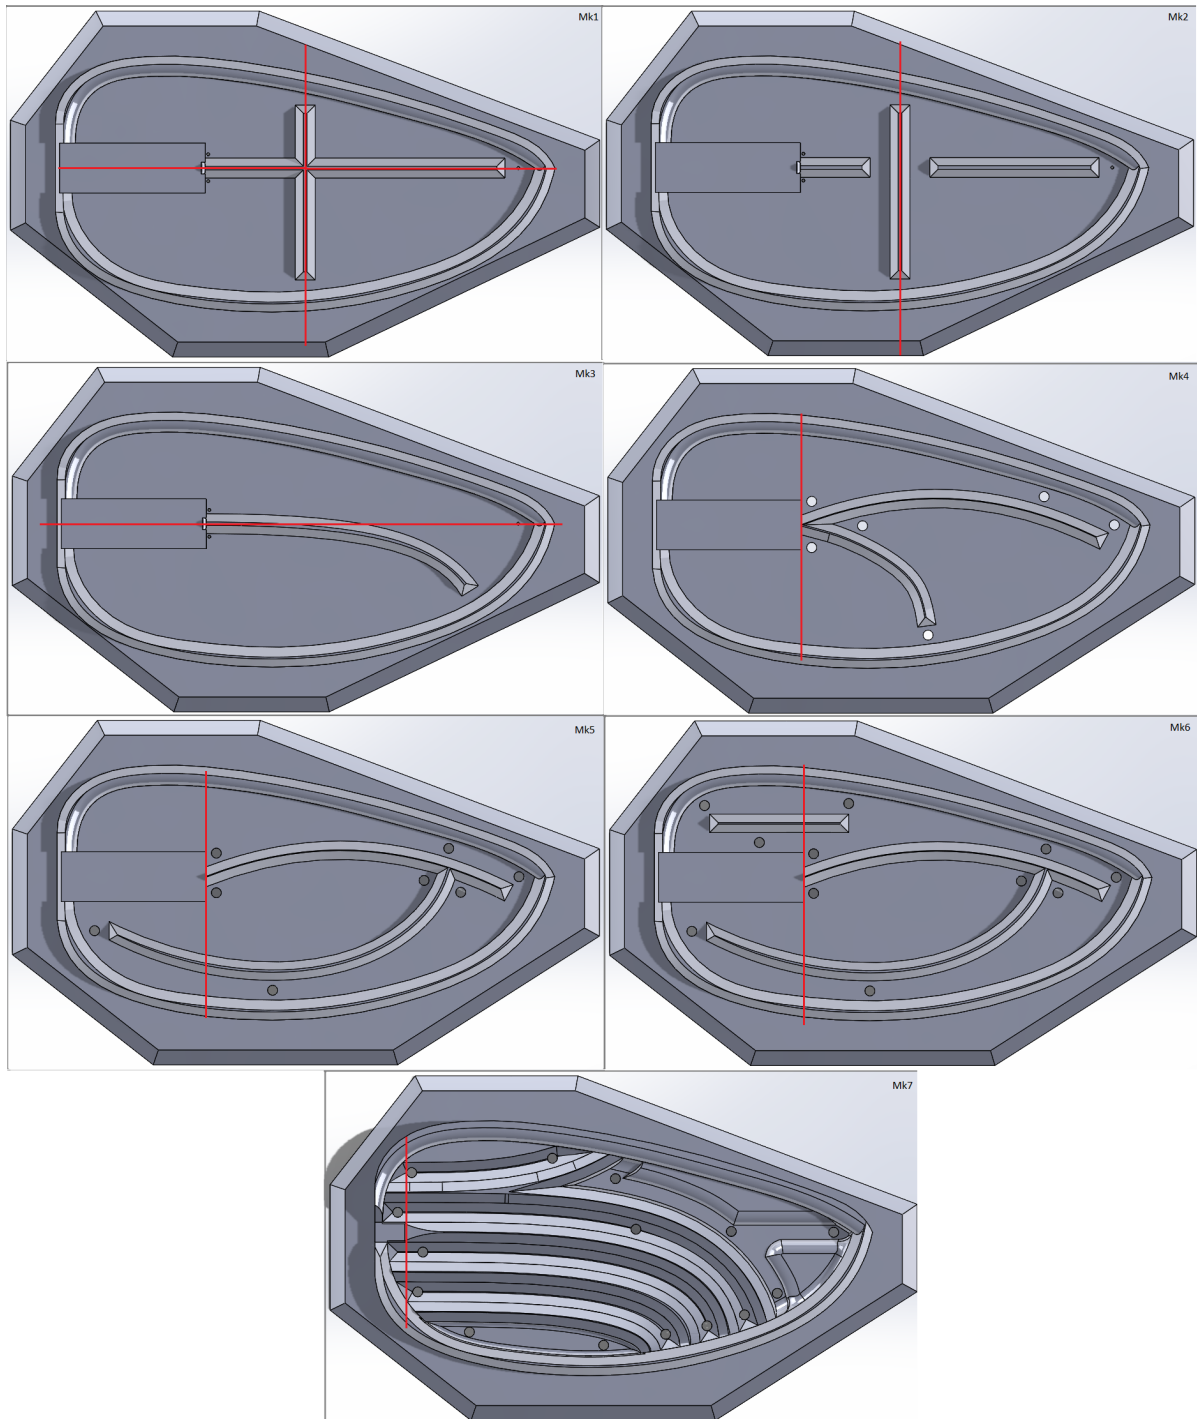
Various wing designs for vacuum forming with identified fold lines marked in red.
